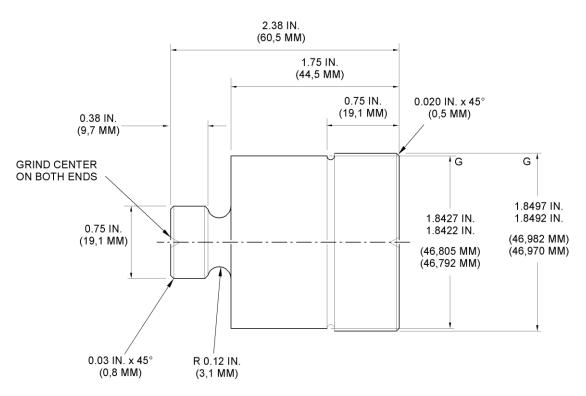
Speed Pickup Adjustment Plug (for use with spur gear P/N 23072-1220)
